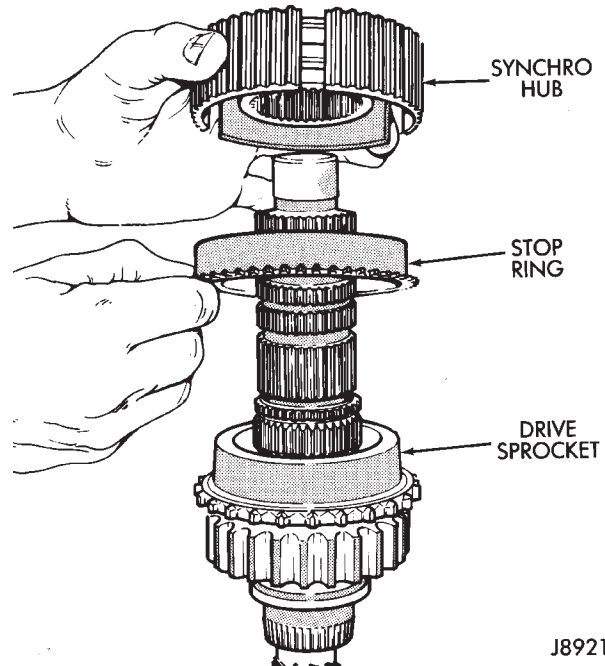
Drive Sprocket, Stop Ring And Synchro Hub Installation
